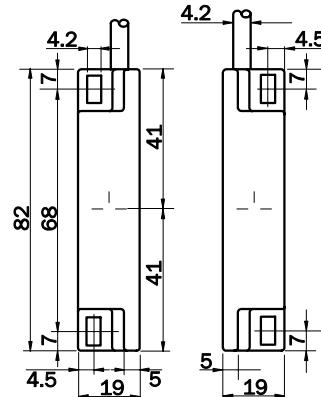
Dimensional drawing RE300-DA.. magnetic safety switch
